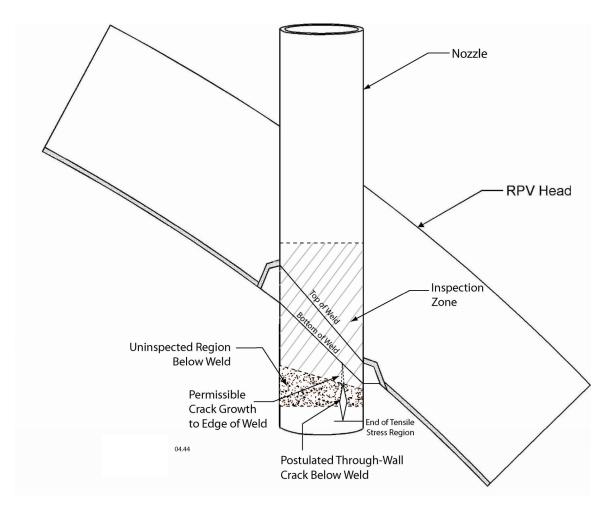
Axial Flaw Assumption for Uninspected Region below J-Groove Weld
